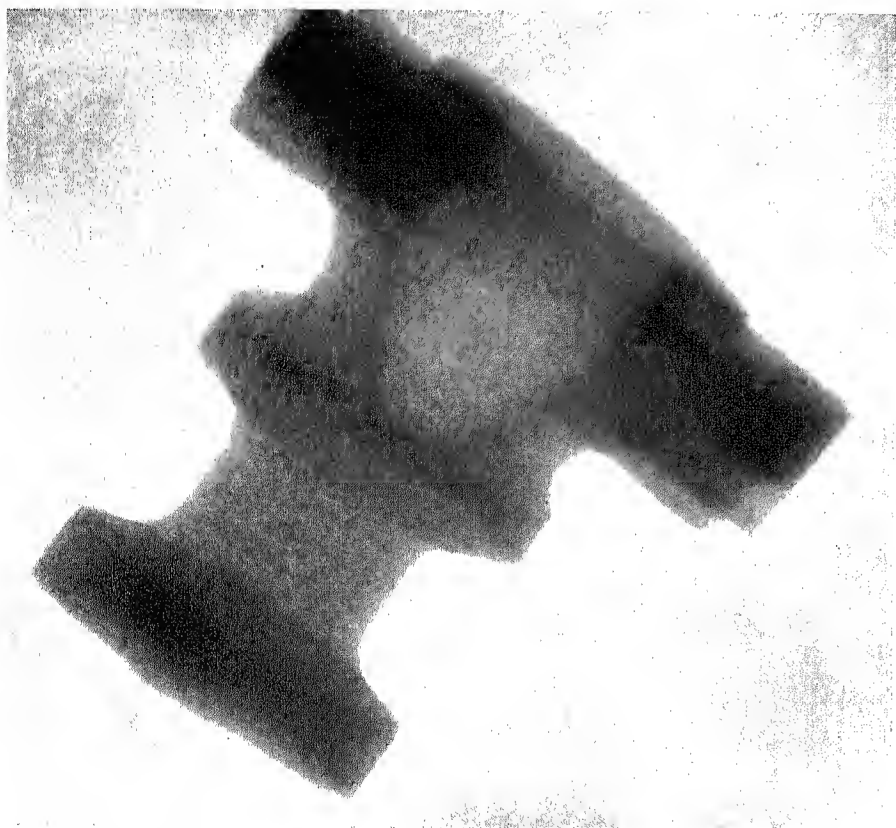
Radiograph by radium of 3½-in. aluminium alloy casting, showing porosity. Exposure 1½ hours at distance 28 in.
